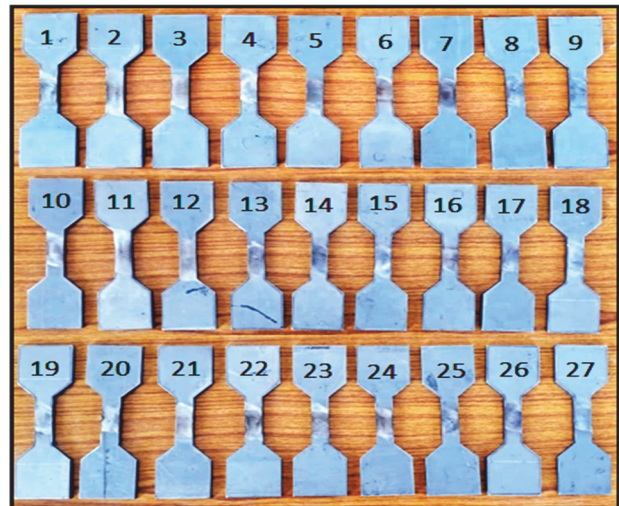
AISI410 TIG welded Tensile Specimen
